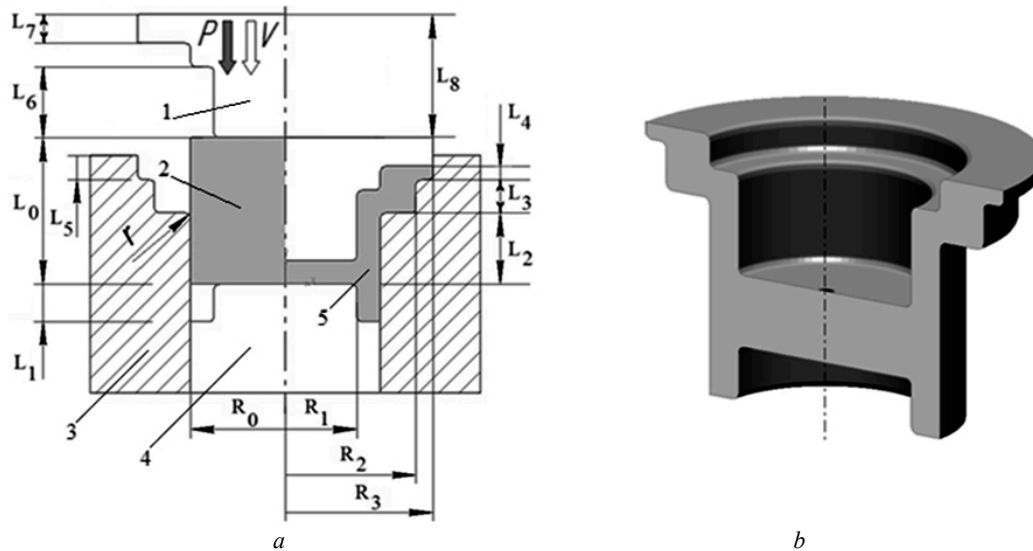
Scheme of cold forging process with enclosed dies (a) and formed part (b), 1 – punch, 2 – billet, 3 – lower die, 4 – mandrel, 5 – formed part
